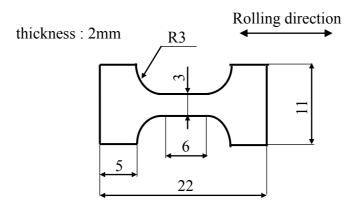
Dimension in mm and morphology of tensile the test piece.
